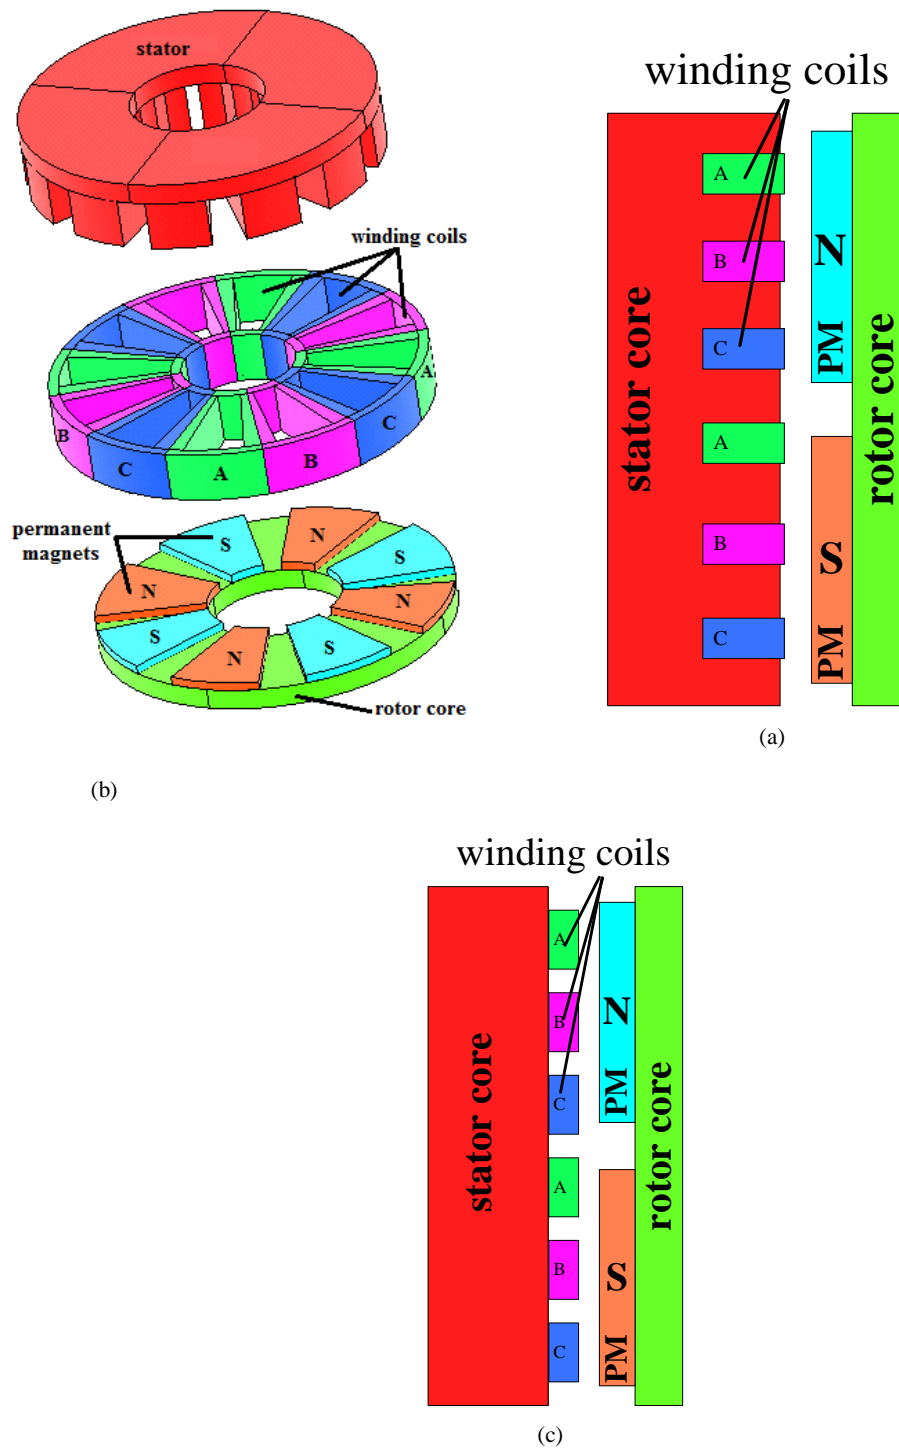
Construction of single-sided AFPM machine, a) 3D-view of a single-sided AFPM machine; b) slotted-stator single-sided AFPM machine and c) slotless-stator single-sided AFPM machine.
